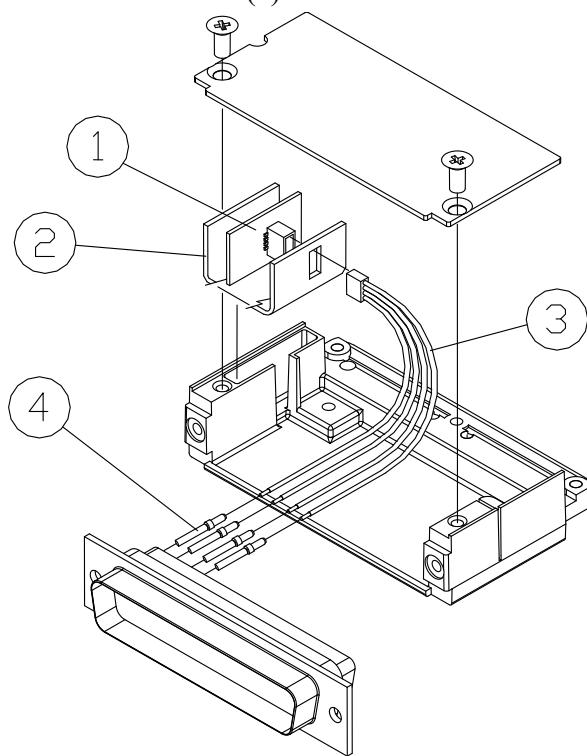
Backshell Assembly (Configuration Module with Spacer)
